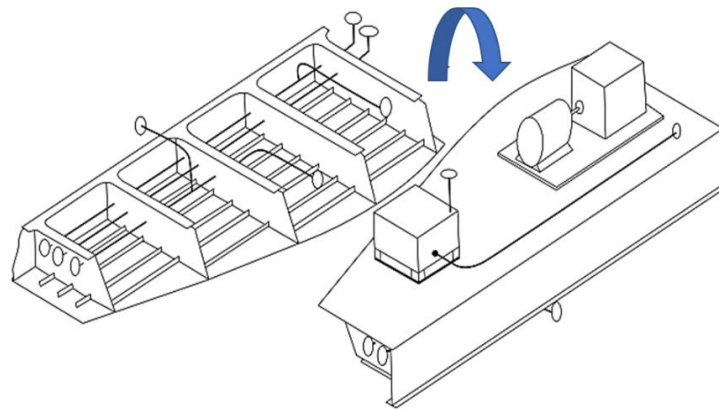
Assembly unit outfitted on both sides (Eyes, 2012).
